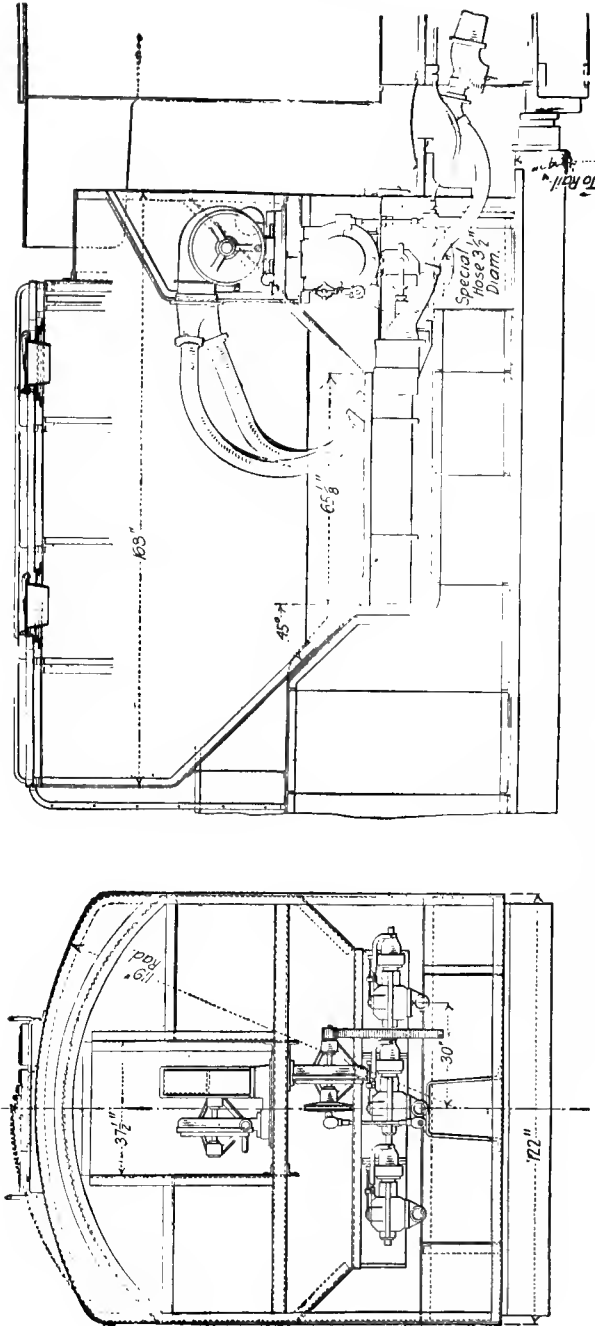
Triple Feeder Equipment on Locomotive Tender. A., T. & S. F. Rwy.
